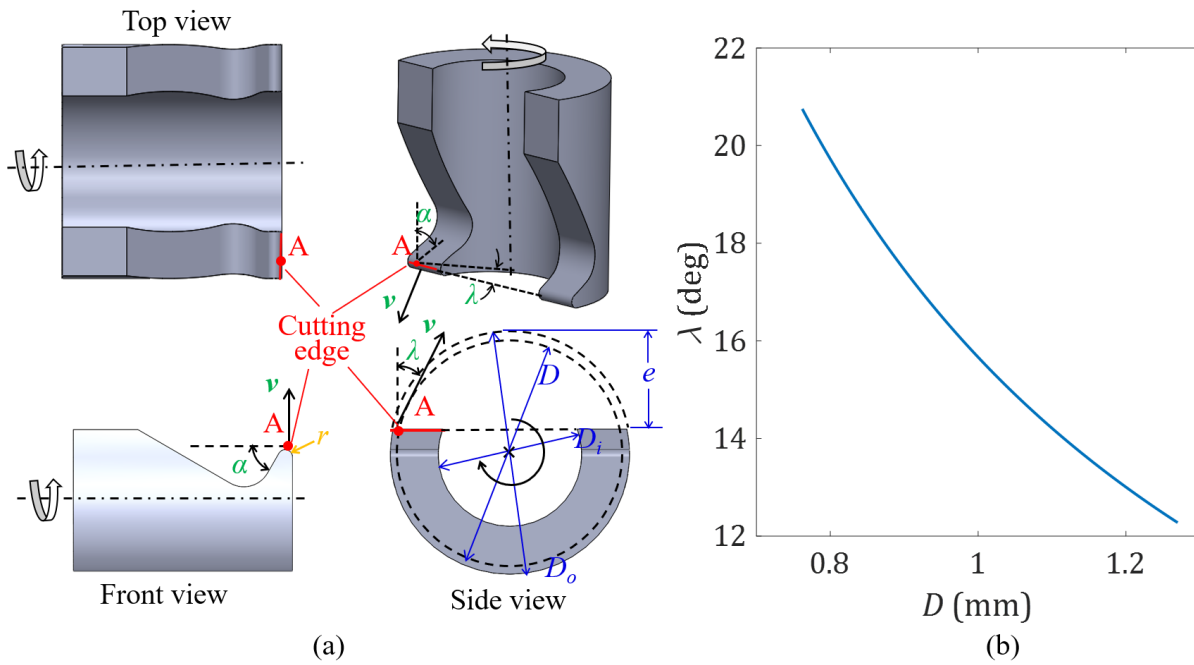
(a) Clot cutting tool and (b) inclination angle of the straight cutting edge.
